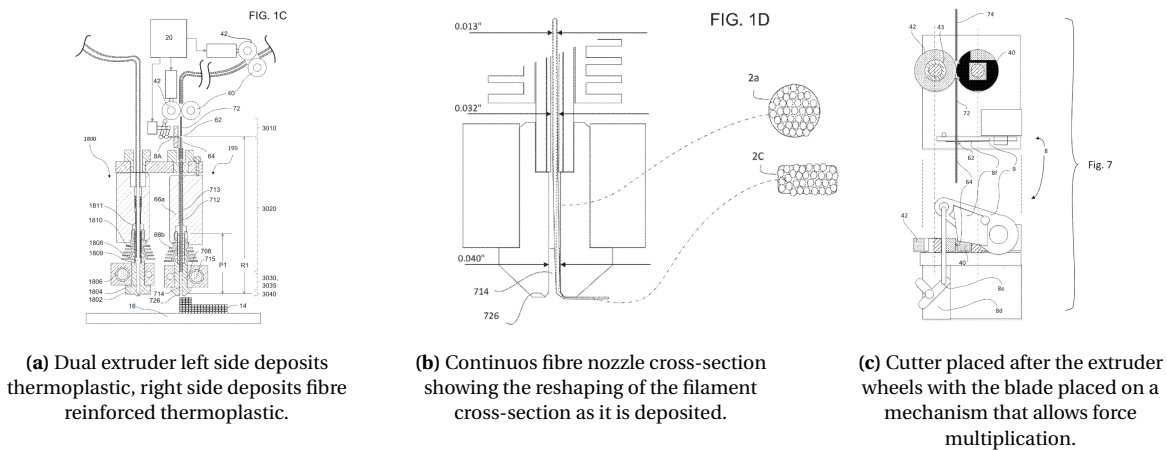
Markforged printer, using a dual extruder concept with pre-impregnated fibre reinforced cylindrical filament and regular FDM filament[41, 42]
